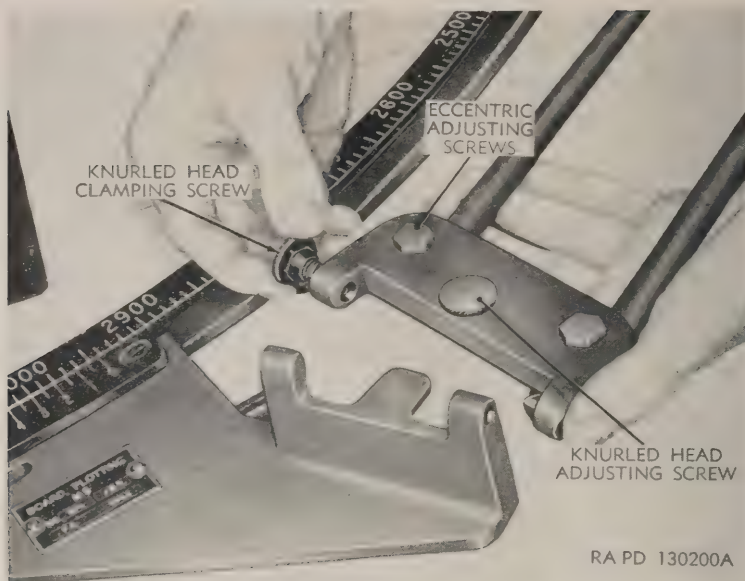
Installation or removal of the drafting machine—plotting board M5 or M5A2.
